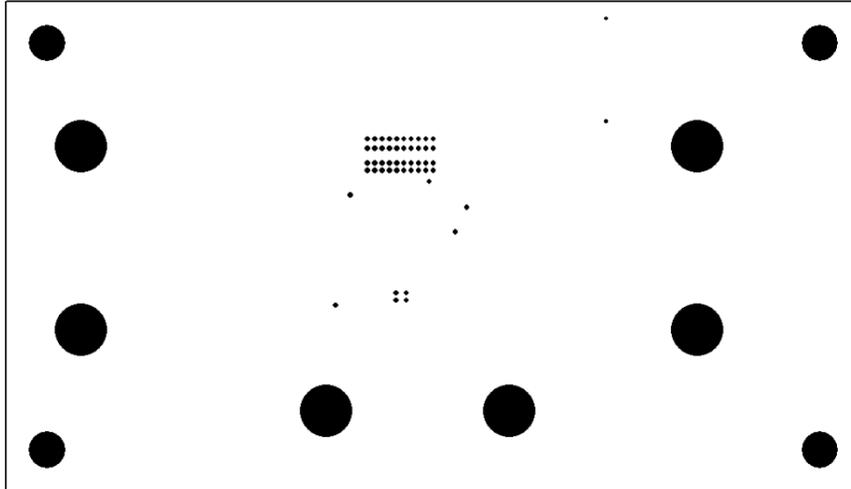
EPC7C023/024 Demo/Eval Board Drill Pattern.
